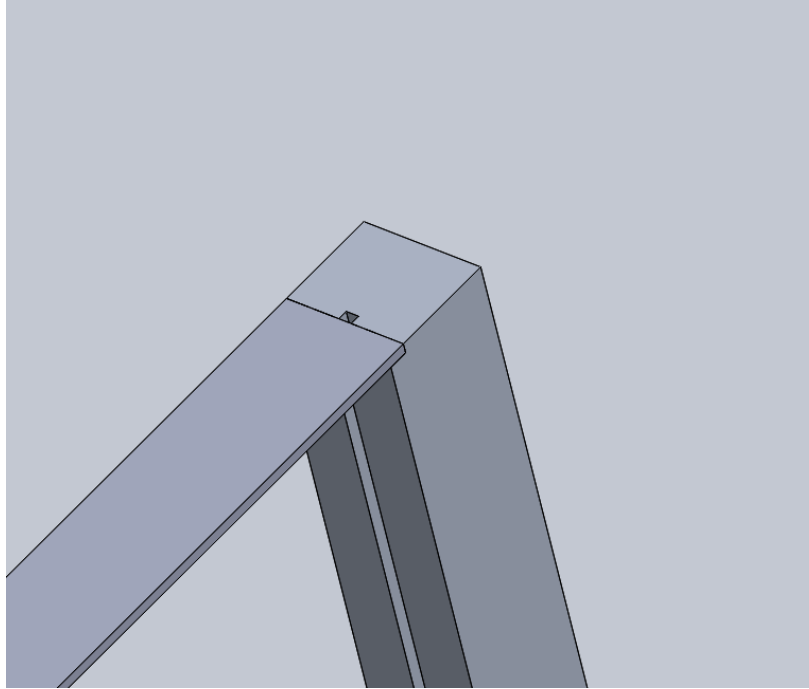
Drawer support with the drawer sheet fit into the groove. Note the other side of the drawer support is not shown.
